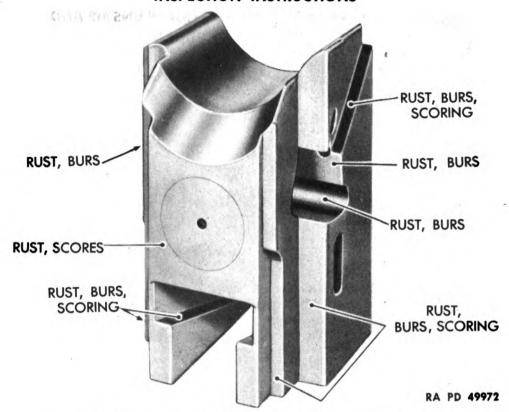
Breechblock Showing Points to be Inspected and Possible Defects
